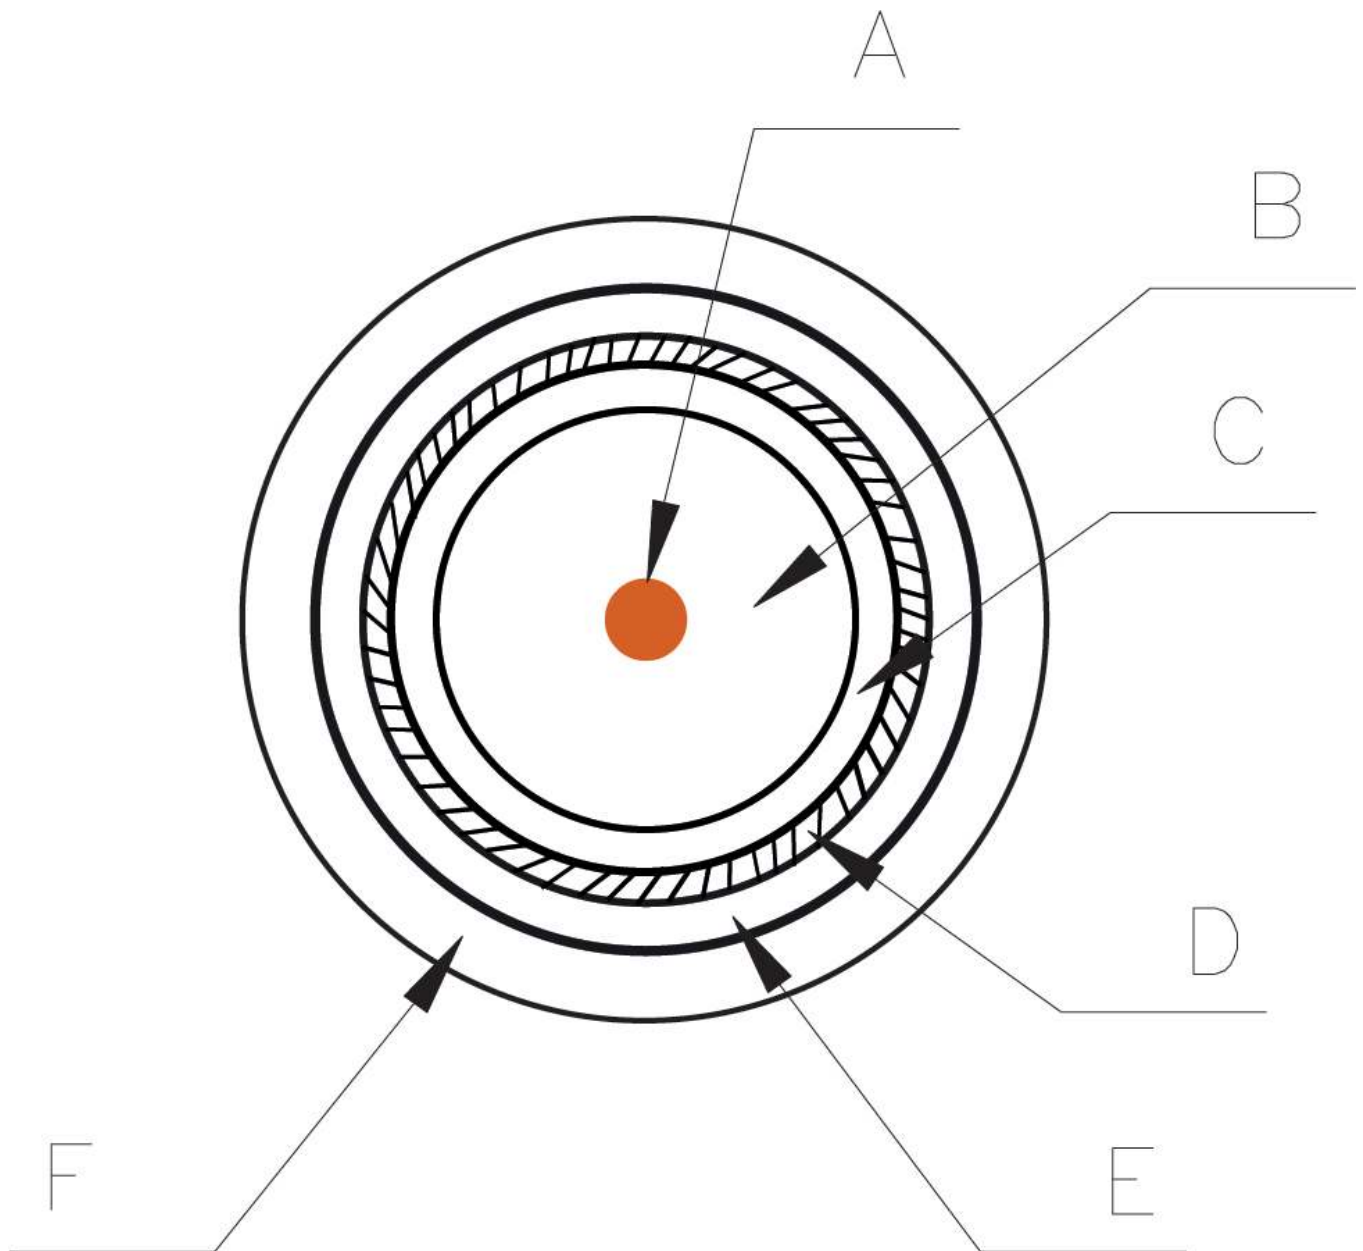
DETAIL VIEW OF THE COAXIAL CABLE SECTION
